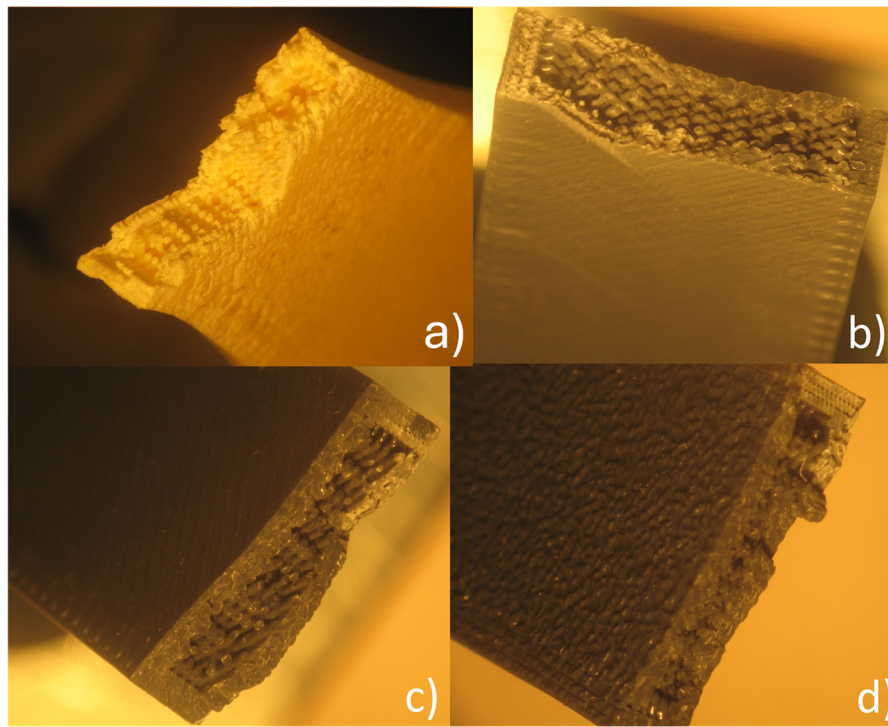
Fracture surfaces of tensile PLA specimens: virgin PLA (a) and recycled PLA printed at 220 °C (b), 237 °C (c), and 255 °C (d).
